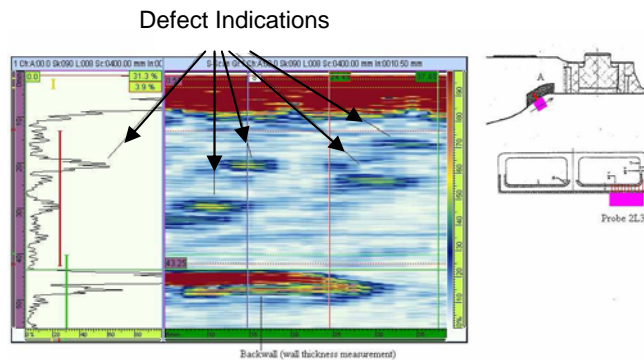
Ultrasonic Phased Array C-scan Showing Multiple Casting Defects
